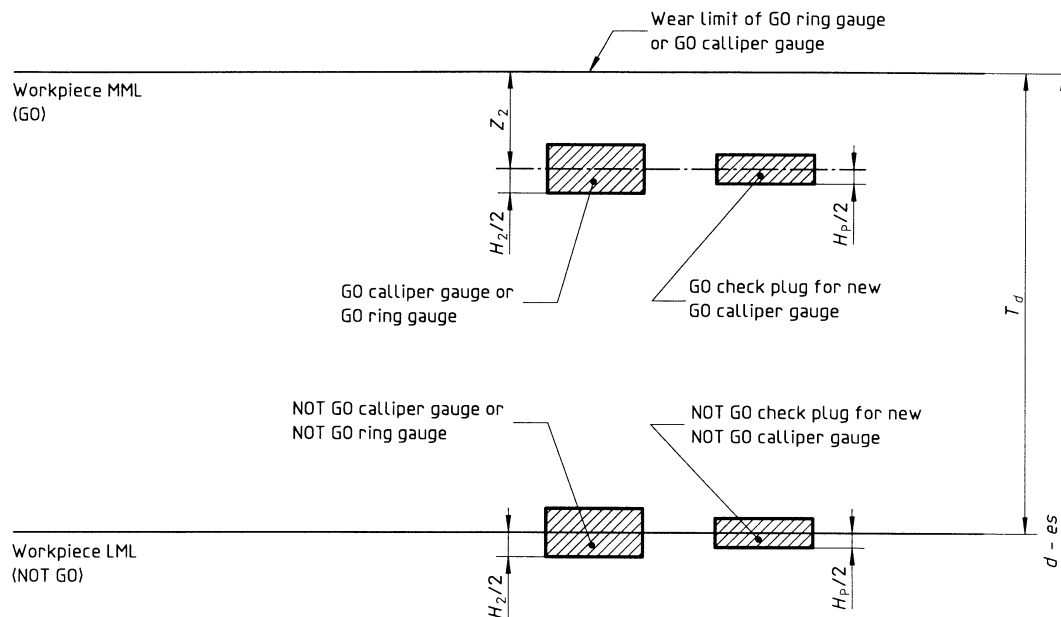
Tolerance zones for plain gauges for major diameter of external threads (diagram)
